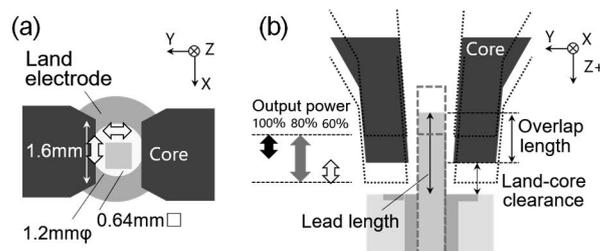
Schematic images of (a) top-view and (b) side-view of IH soldering
